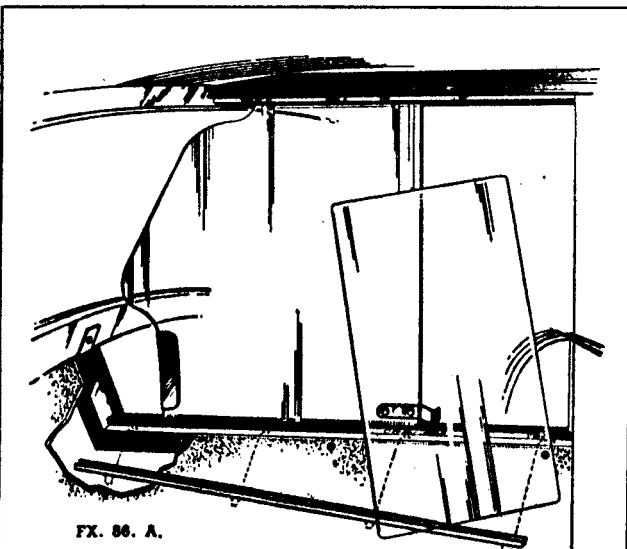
Taxi driver's division panel. By removing the lower window channels both glass panels may be removed.
